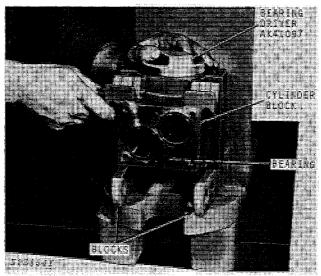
Positioning Cylinder Block with Bearing in Press
